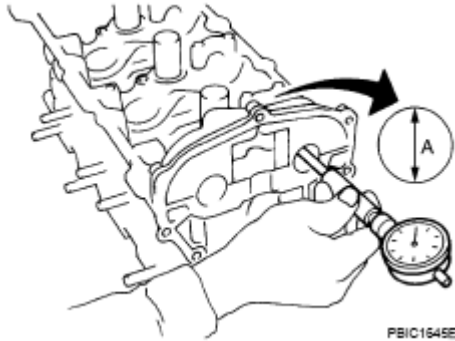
Measuring Inner Diameter A Of Camshaft Bracket With Bore Gauge
